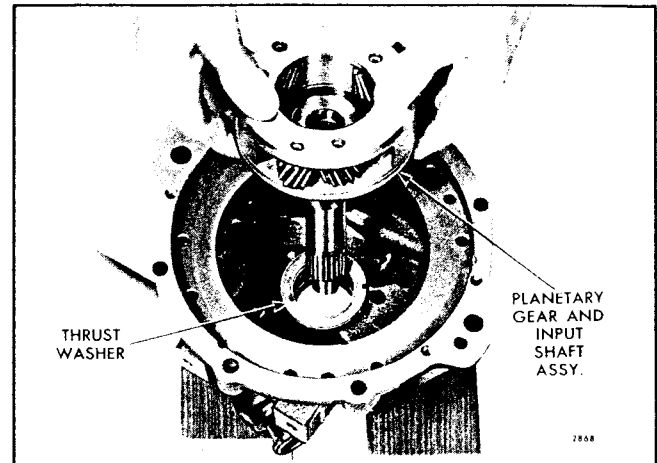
Installing Planetary Gear and Reduction Gear Input Shaft Assembly in Gear Housing (1.5:1 and 2.1:1 Ratios)
